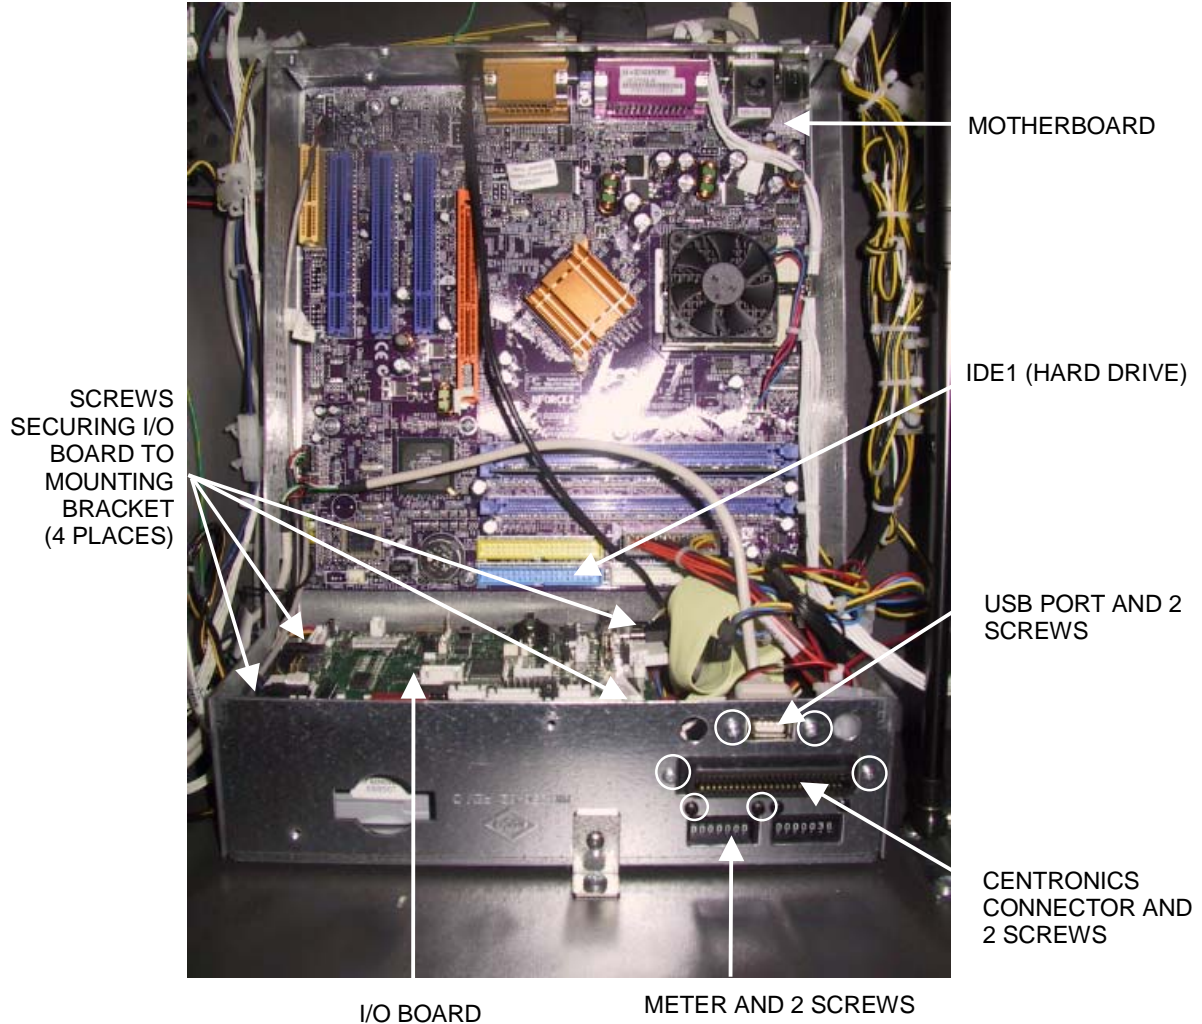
ELECTRONICS BOX WITH COVER REMOVED
